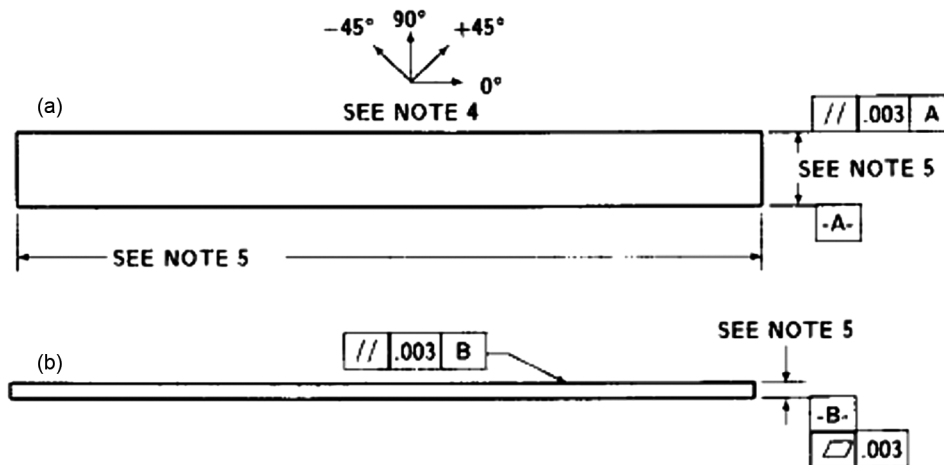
Tensile test geometric specimen (ASTM D3039/D3039M a) top view condition of the specimen and b) side view condition of the specimen.
